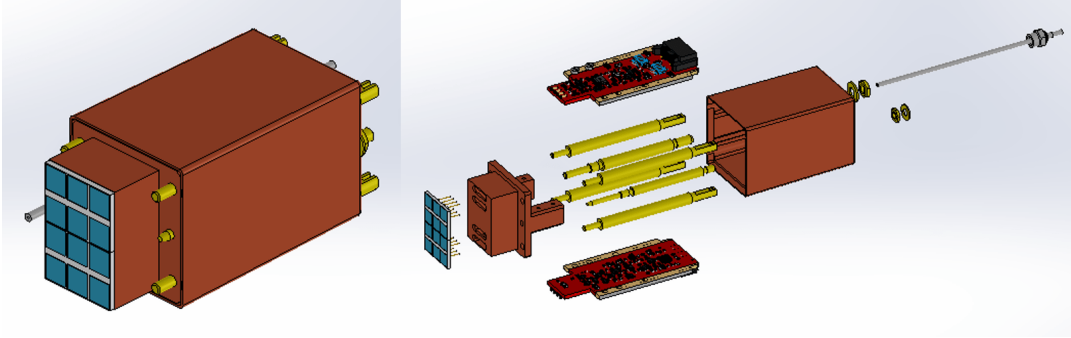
Left: assembly of the FEE holder. Right: exploded view of the FEE holder with all the components. Two SiPMs glued on the inner copper support, FEE AMP-HV boards, Faraday cage, screws and optical fiber needle.
